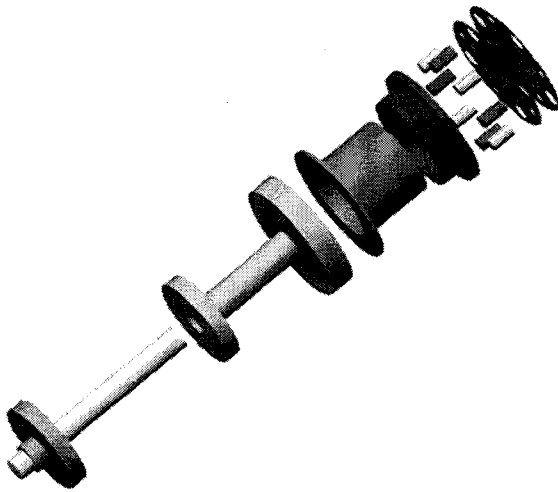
Exploded View of the JPL Micro-Ion Engine
